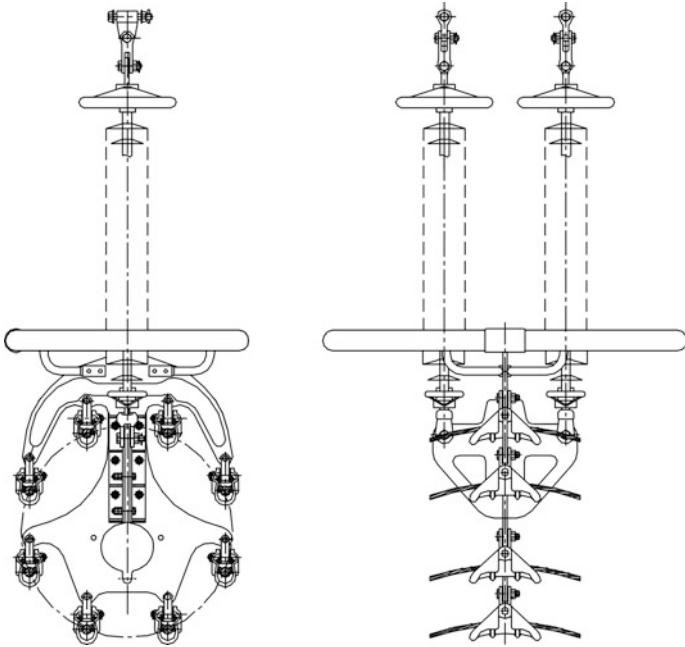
Layout of I-type double-suspension string in 1000 kV line
